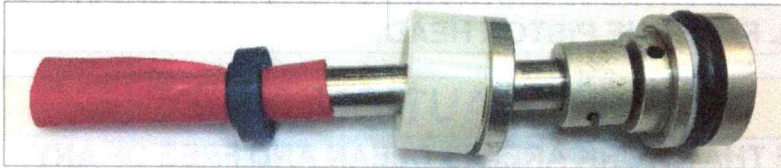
COMPRESSION RING installed onto PISTON ROD GUIDE BUSHING.
